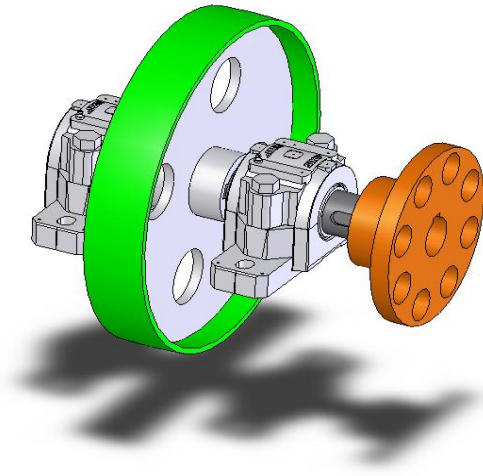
Schematic view of a typical flat belt pulley and coupling arrangement.
